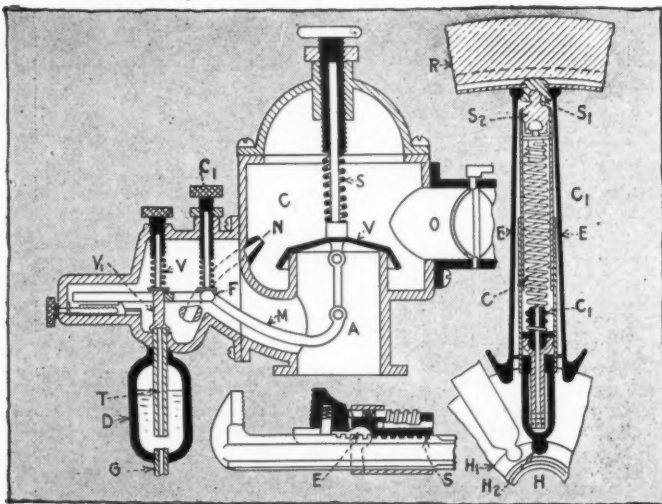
Watson positive-working carburetor. Fig. 2—Mossberg pipe-wrench design. Fig. 3—Wilkes automobile spring wheel
